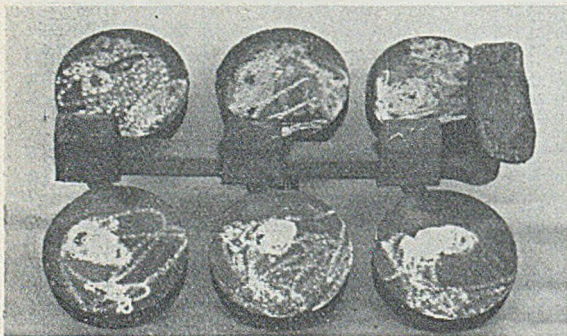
Larger Size of Coupling Casting to that shown in Fig. 11, also with Running System attached.
